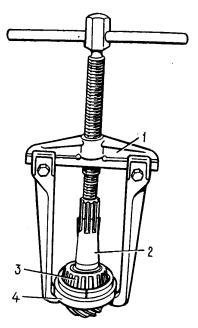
Removing Drive Pinion Rear Bearing Inner Cone with General-Purpose Remover Tool A.40005/1/7:
